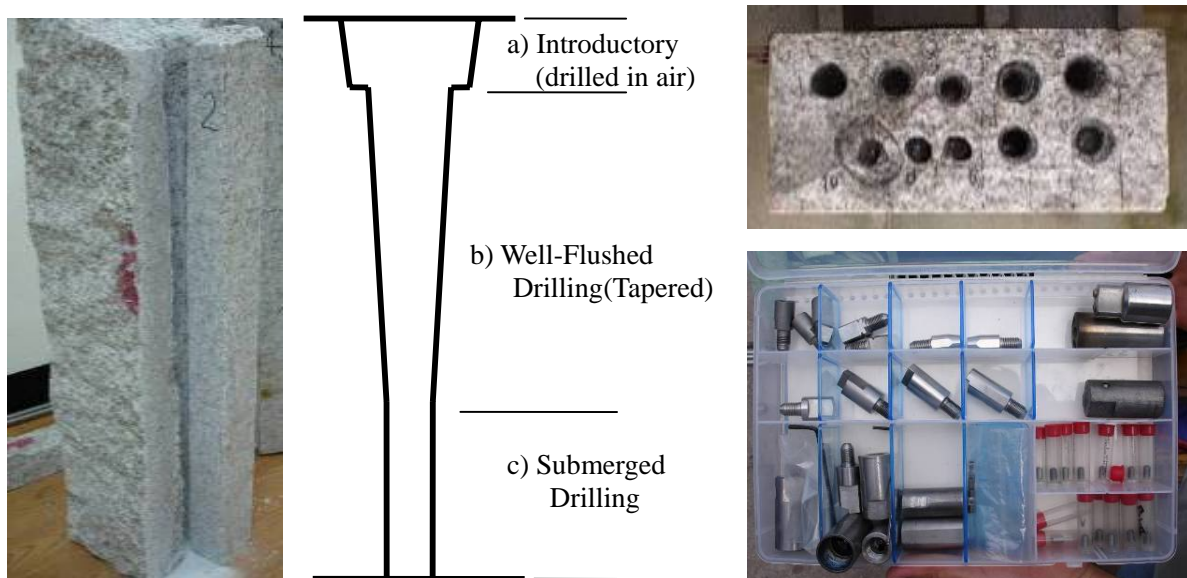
Cross-Sectional View of Drilled Holes and Various Nozzle Heads
